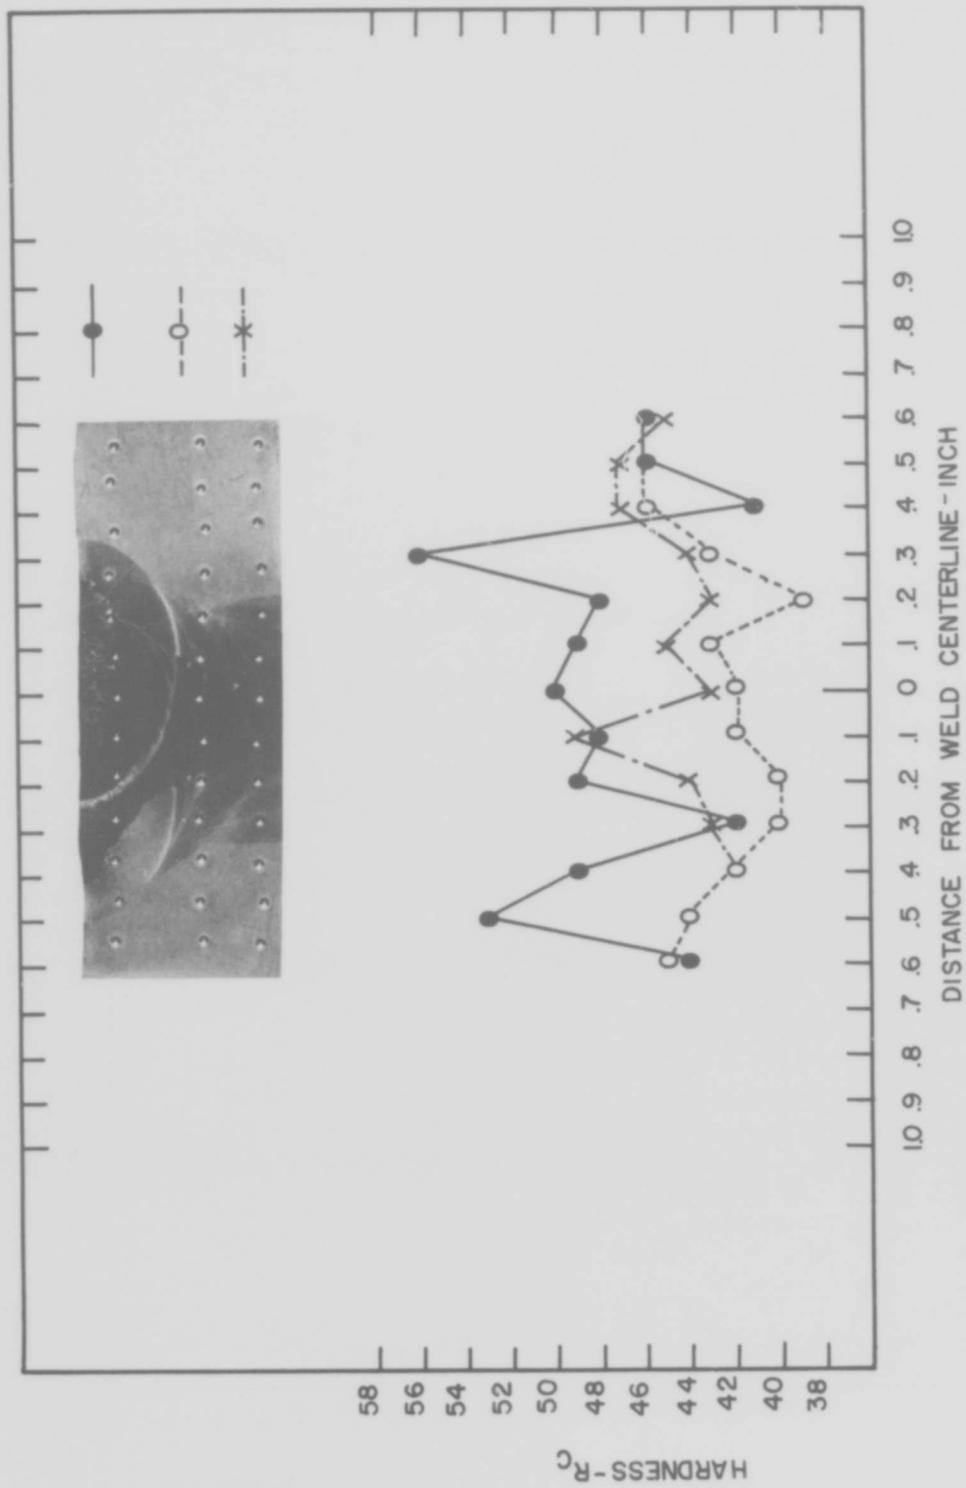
Hardness Survey of TIG Weld No. A232 Made in AMS 6435 Plate Material Tempered at 700°F at a Welding Speed of 4 ipm Using Filler Wire No. 1.
